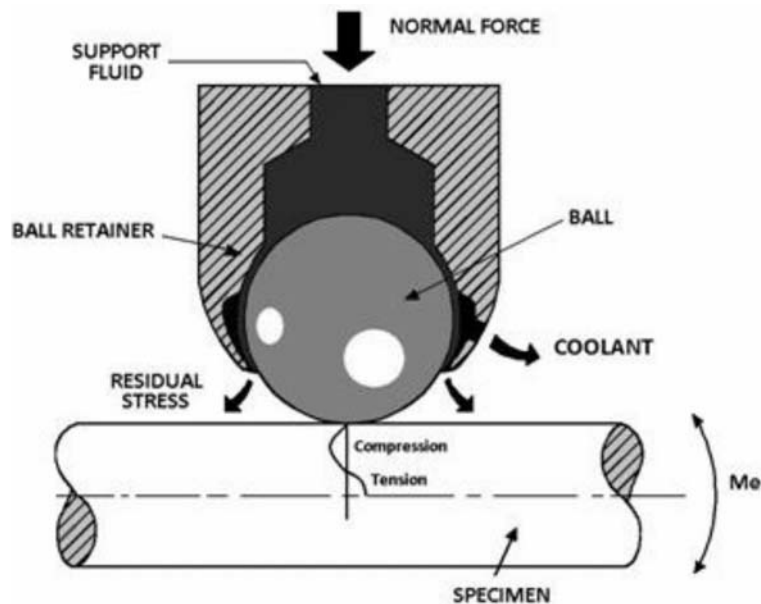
Hydrostatic principle of the ball burnishing tool.
